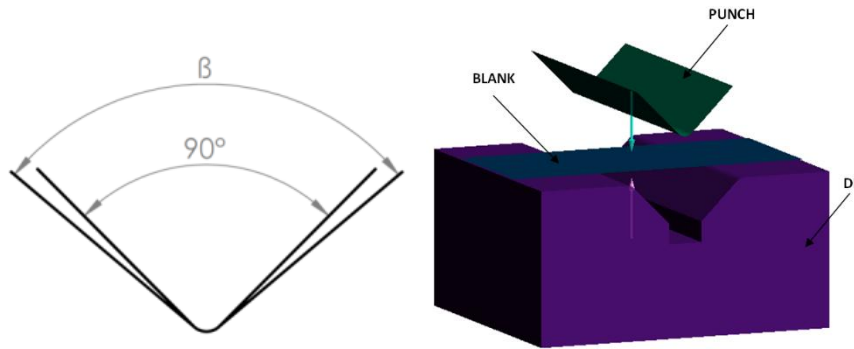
Springback measurement of 90 degree V-shaped stamping(left), CAD model of bending tool with 90 degree working angle used in the simulation (right)
